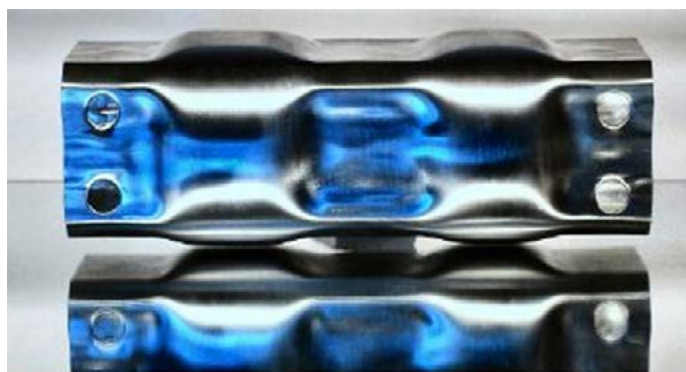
Simultaneous EMPT forming and EMPT cutting of a crash box
